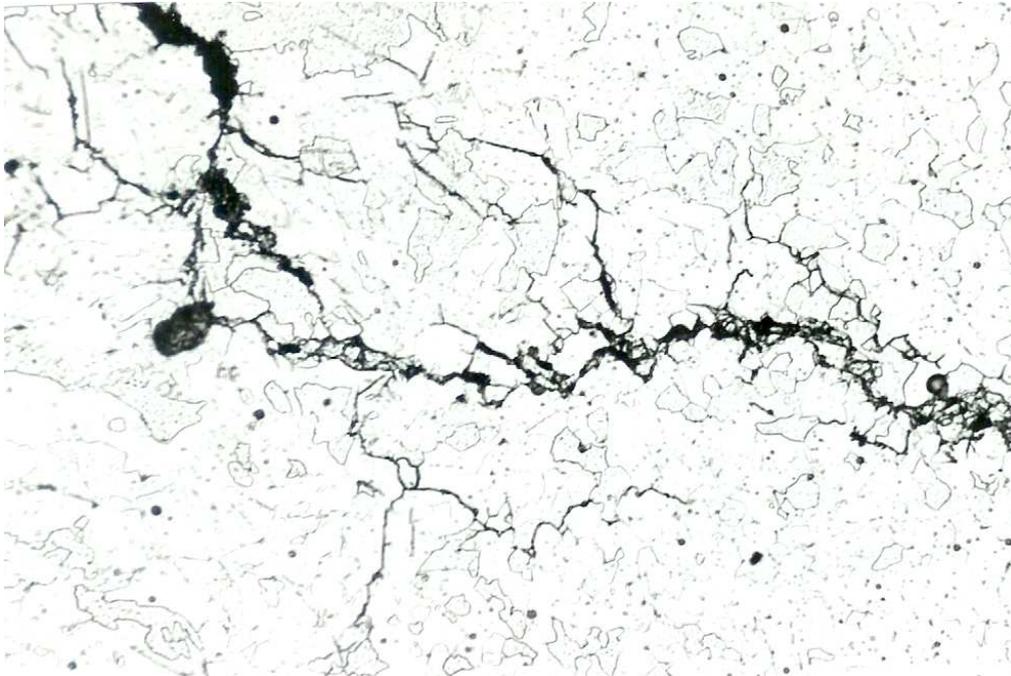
Predominantly inter-granular cracking weld deposit material of seam weld (etchant: nital).
